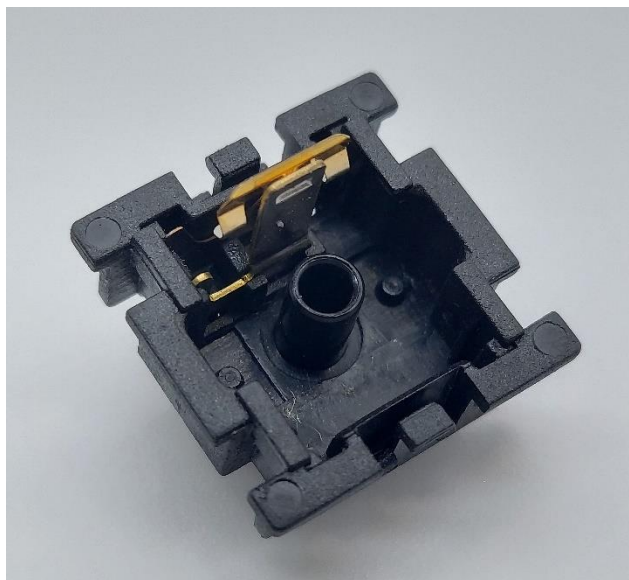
Taiwan Jet Axis bottom housing internal structure.
